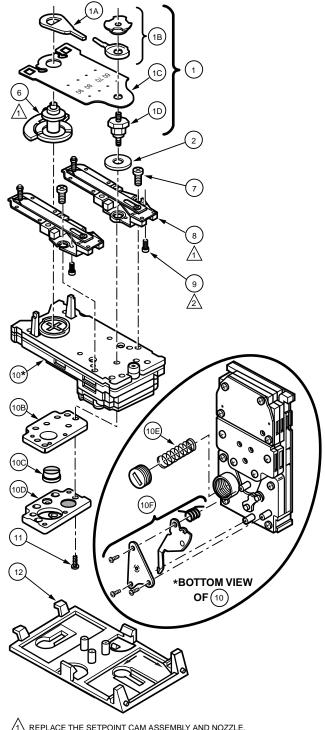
Single Element Thermostat Exploded View Showing Repair Parts and Assemblies.
